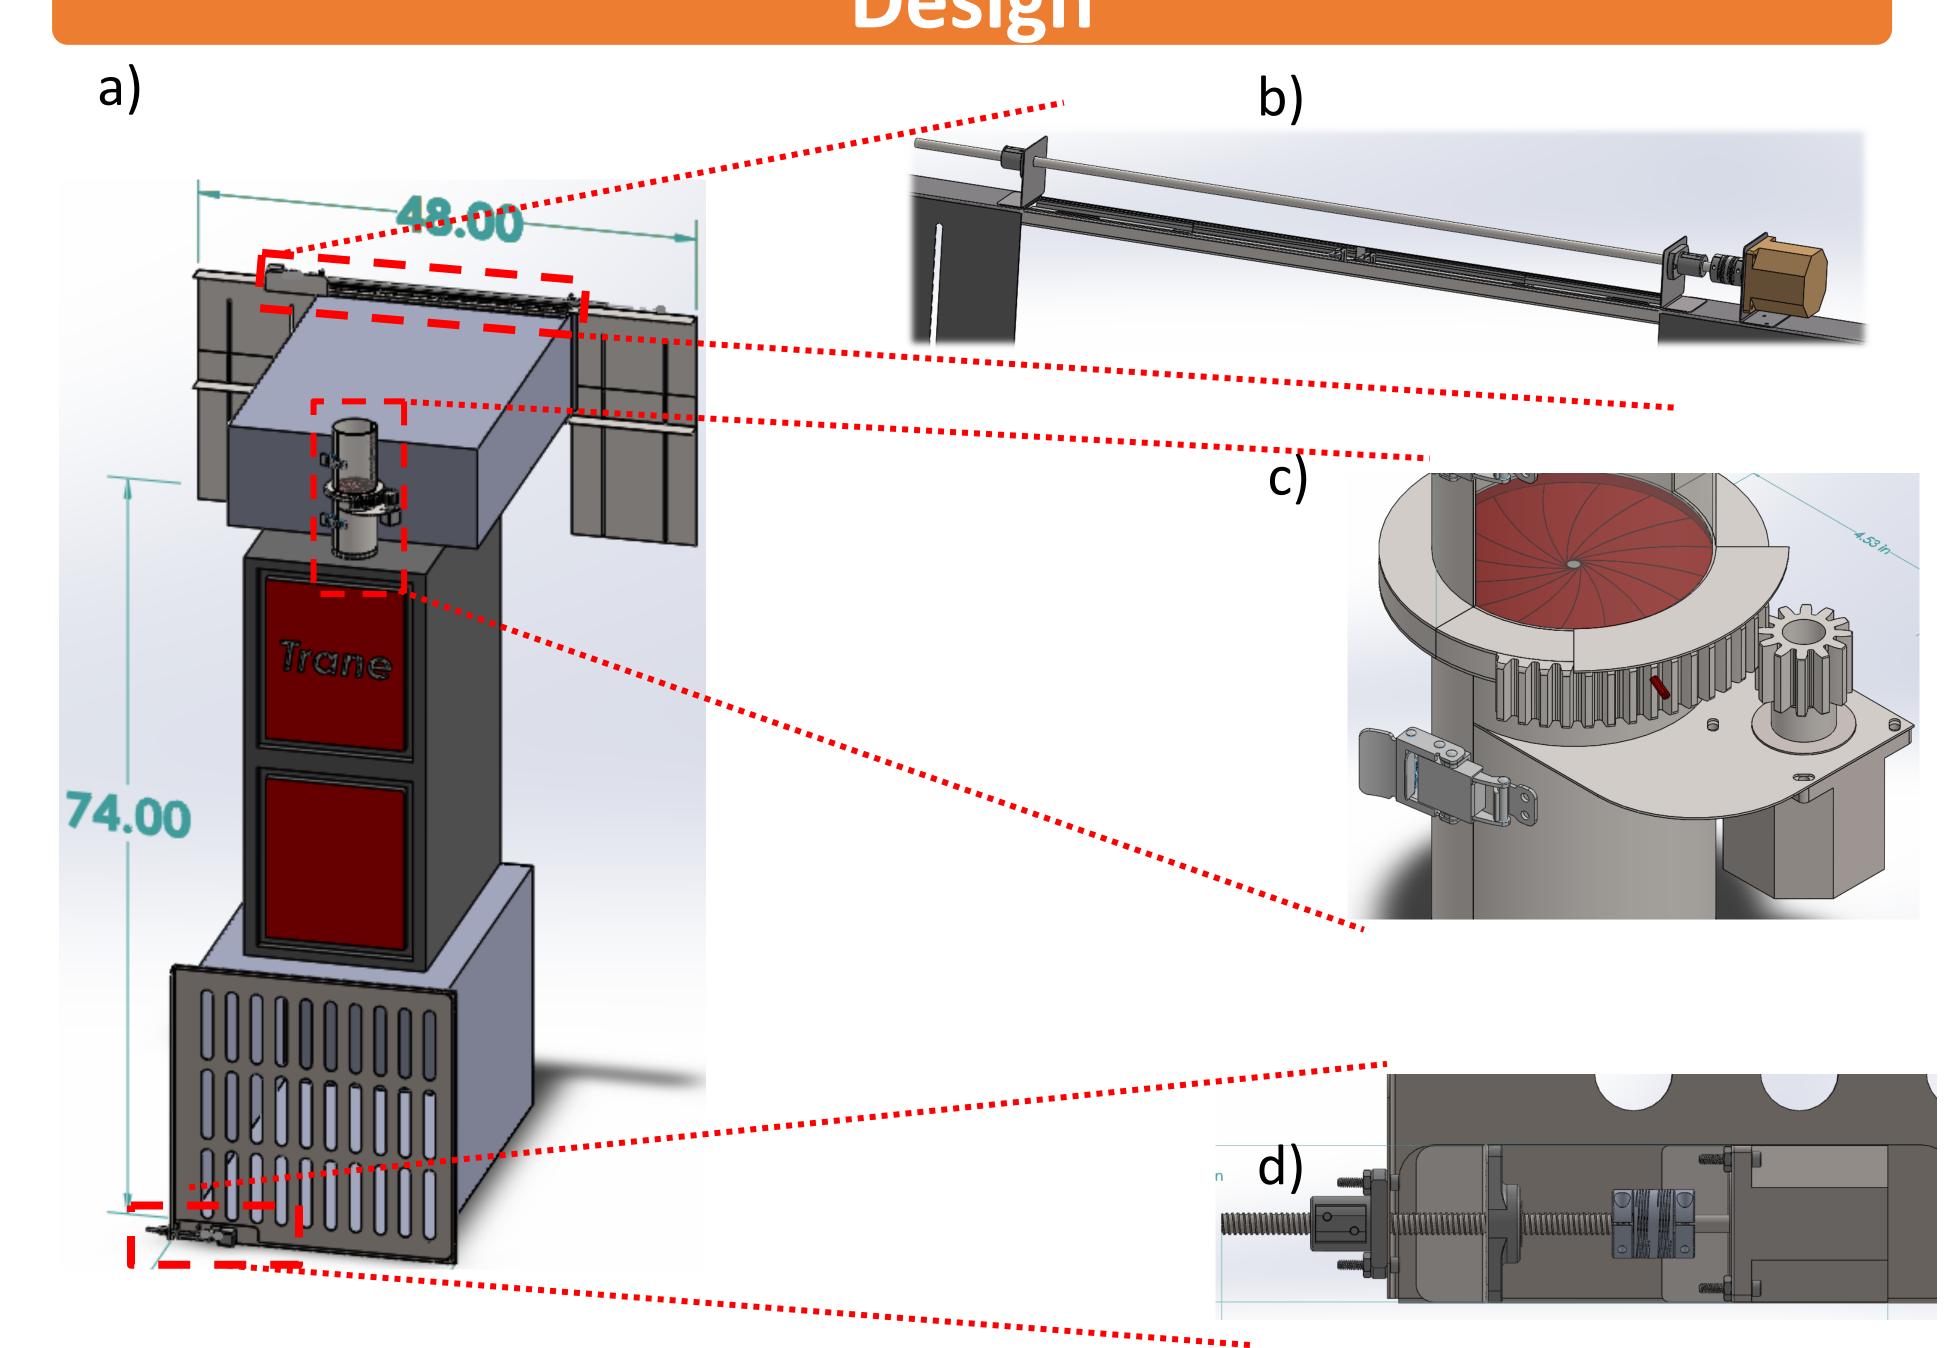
a) Automated furnace test equipment design: b) Inlet Shutter, c) Outlet Shutter, and d) Iris Shutter.
